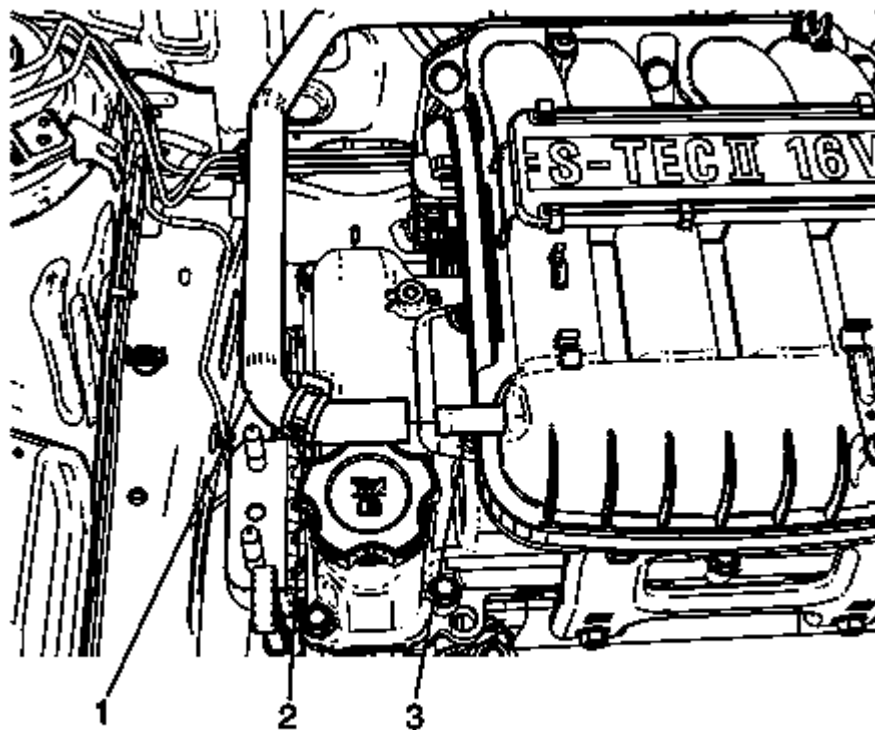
Vacuum Hose Retaining Clamp And Vacuum Hose
